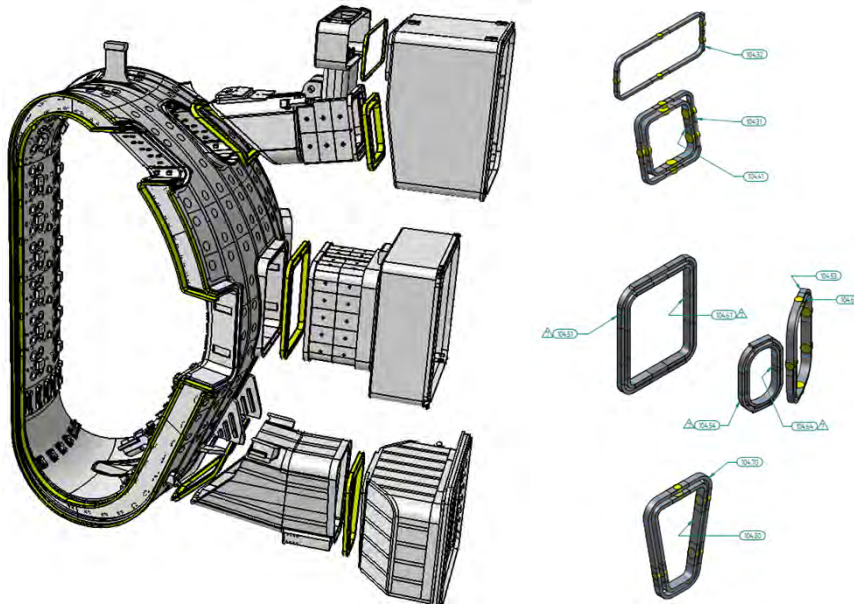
Splice plates and Biscuits of Port welding (Ex. Sector 2)
